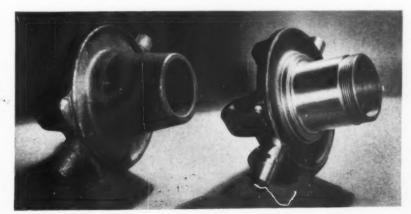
Power axle for an industrial truck is a heat-treated drop forging.
